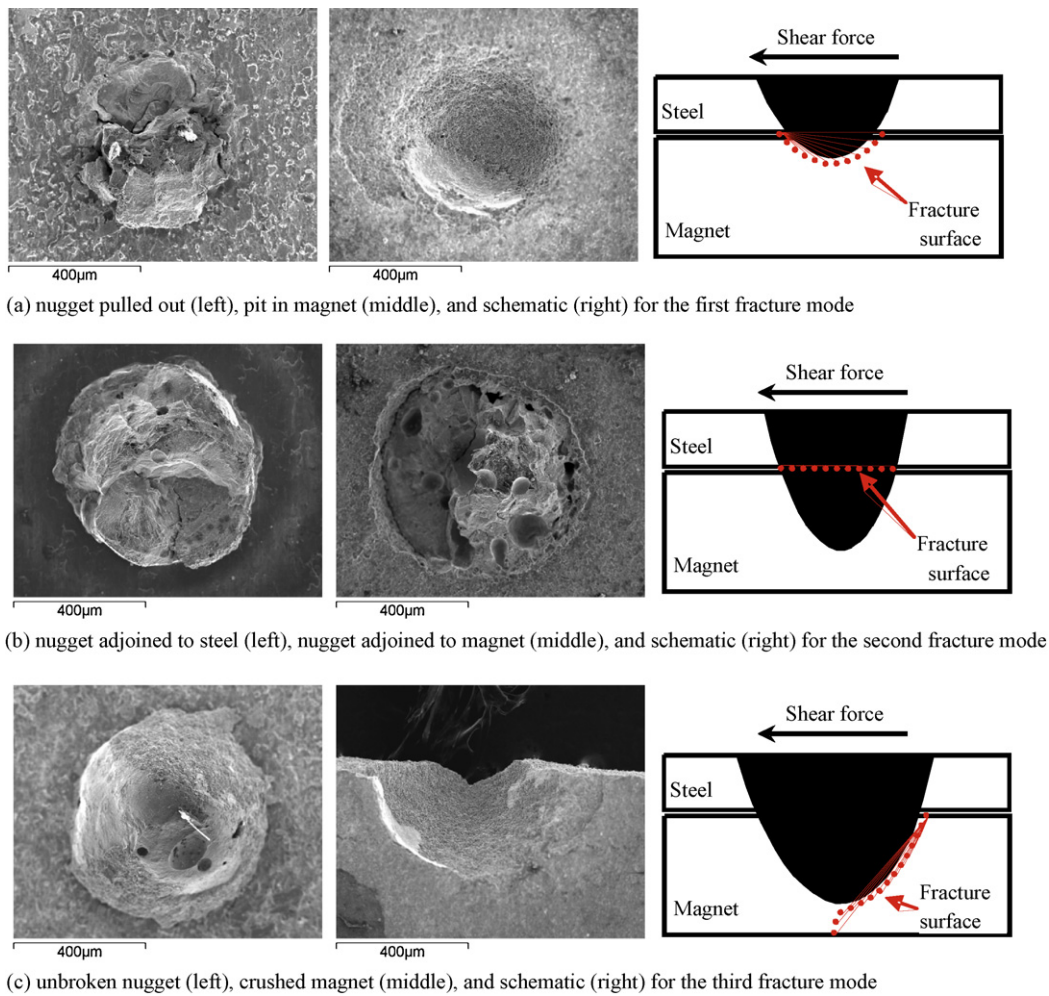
Three fracture modes in shear testing. (a) Nugget pulled out (left), pit in magnet (middle), and schematic (right) for the first fracture mode. (b) Nugget adjoined to steel (left), nugget adjoined to magnet (middle), and schematic (right) for the second fracture mode. (c) Unbroken nugget (left), crushed magnet (middle), and schematic (right) for the third fracture mode.
